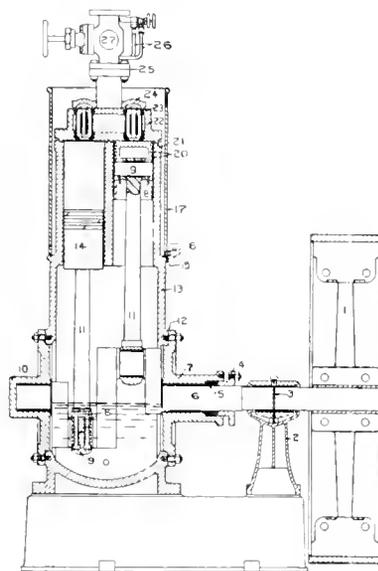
A Sectional View of the Compressor Shown in Fig. 10
